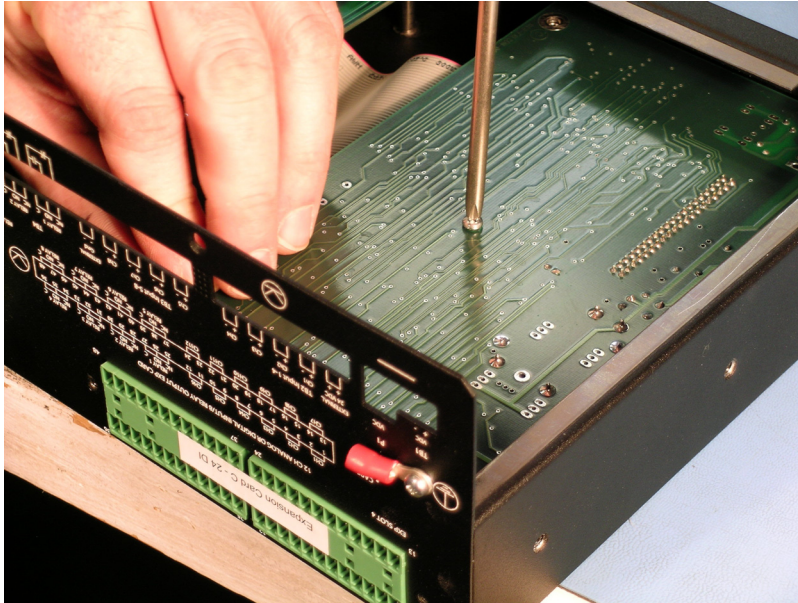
Expansion Card Final Placement in a Two-Rack Unit
